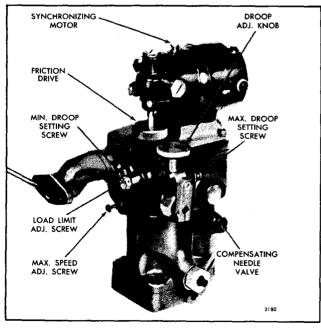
· Typical Synchronizing Motor Mounting and Drive Assembly
